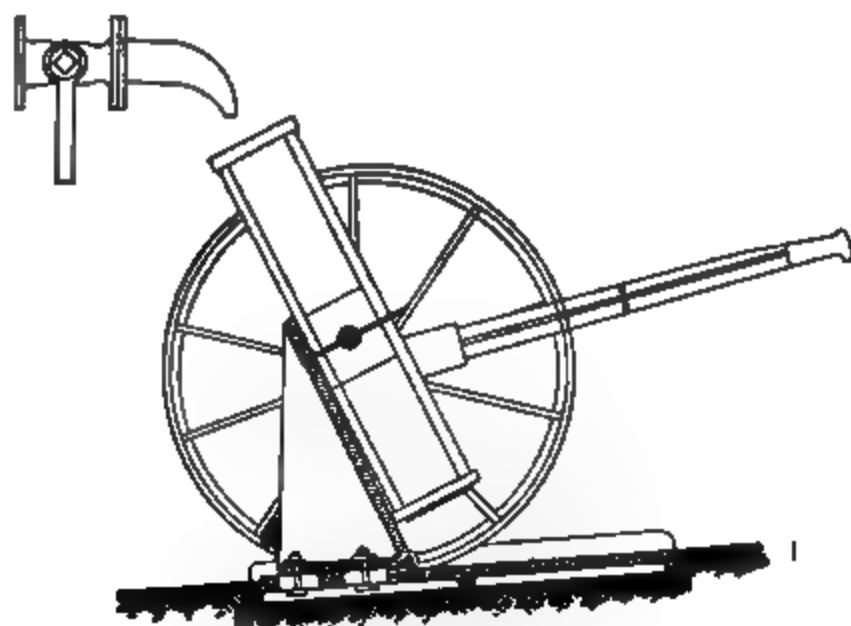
MATTHÉE and SCHEIBLER Movable Moulds.
